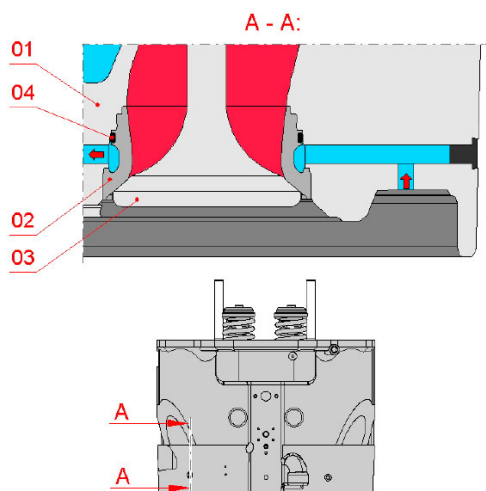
Exhaust valve cooling system using cooling ring [4].
